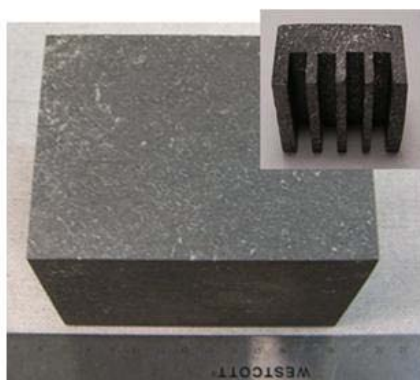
Images of C-Al composite and a machined heat sink parts (inset)
